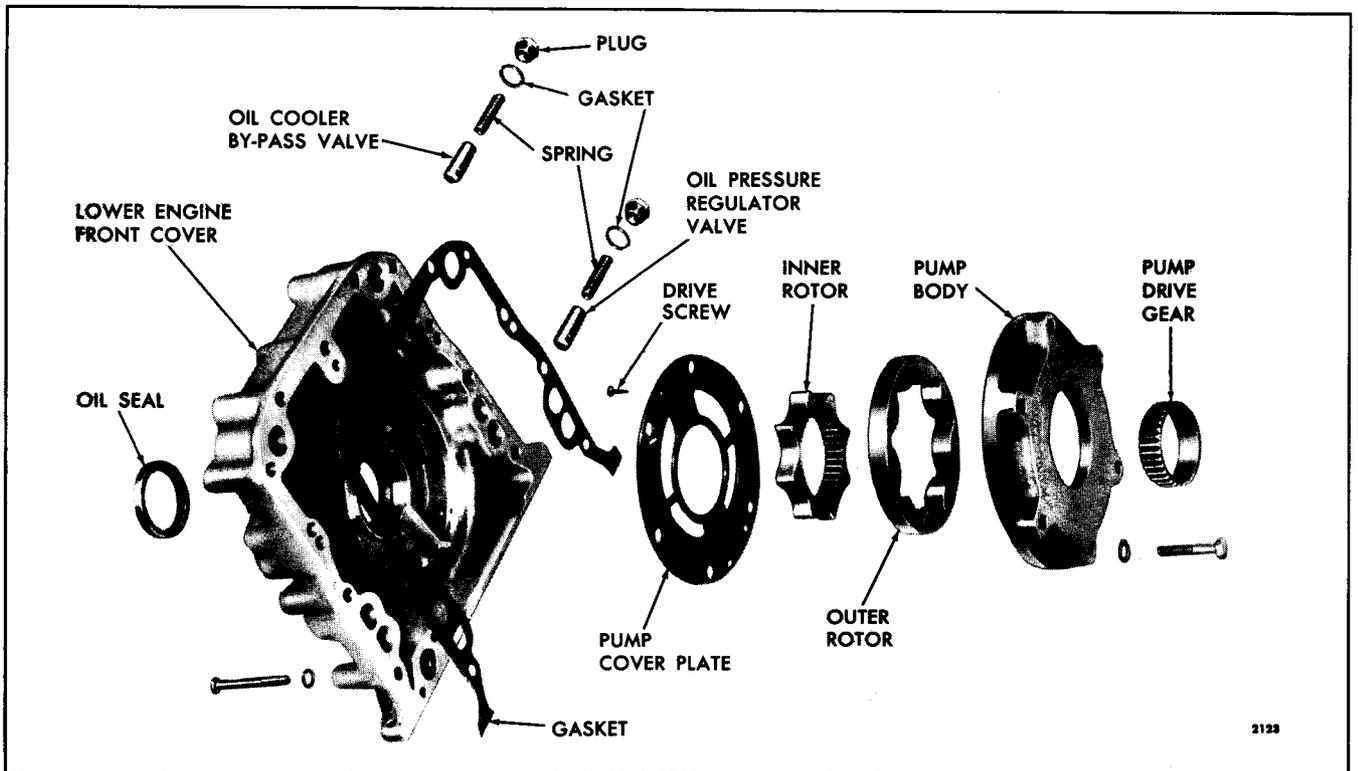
Oil Pump Details and Relative Location of Parts (Former)
